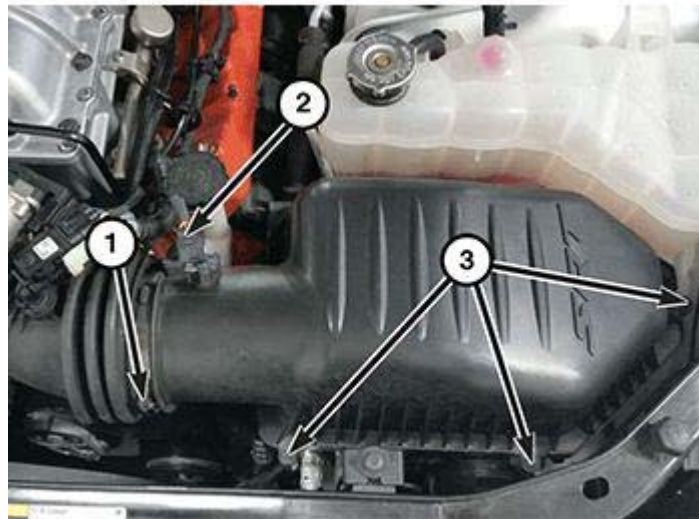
Clamp, MAF Sensor Wire Harness Connector & Air Cleaner Housing Cover Retaining Screws
